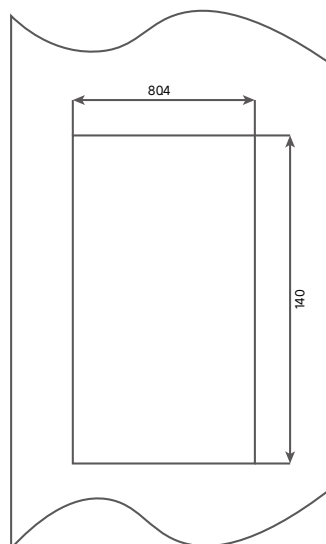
Dimensions of opening holes on the operation panel support (keypad tray)
